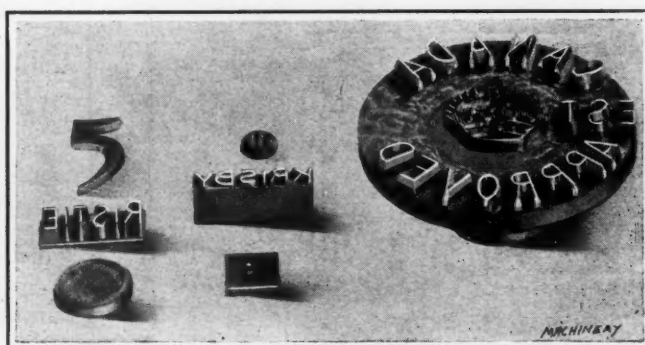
Examples of Engraving where Design is in Intaglio and in Relief, illustrating Range of Work that can be handled on Engraving Machines
